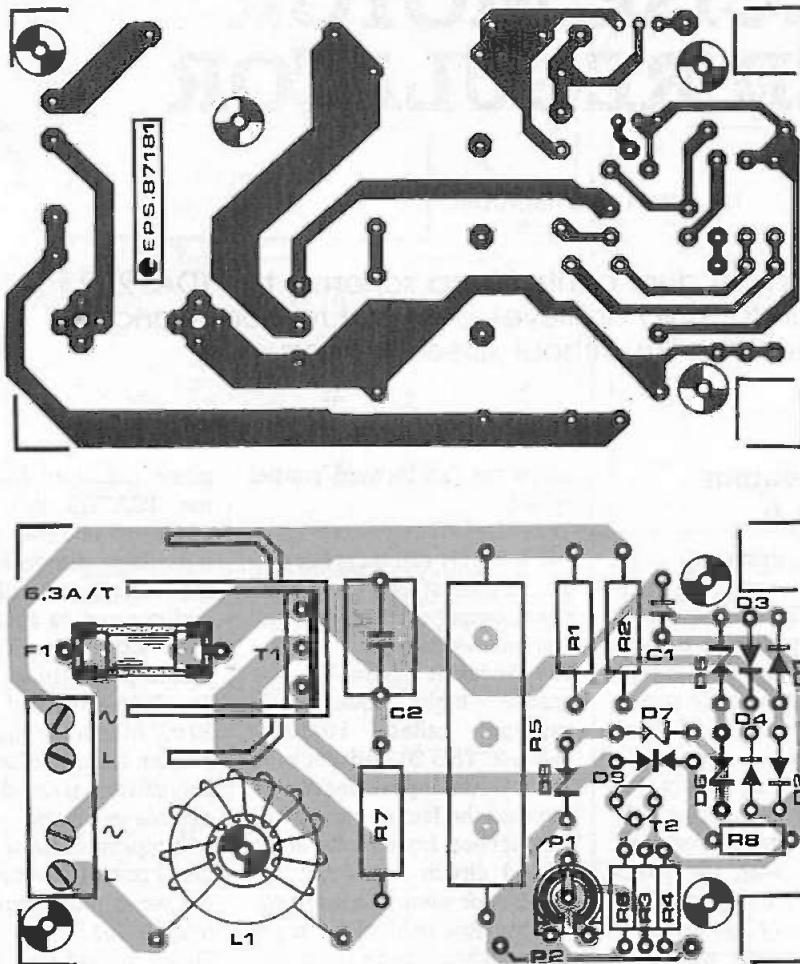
Track layout and component mounting plan for the dimmer PCB.
